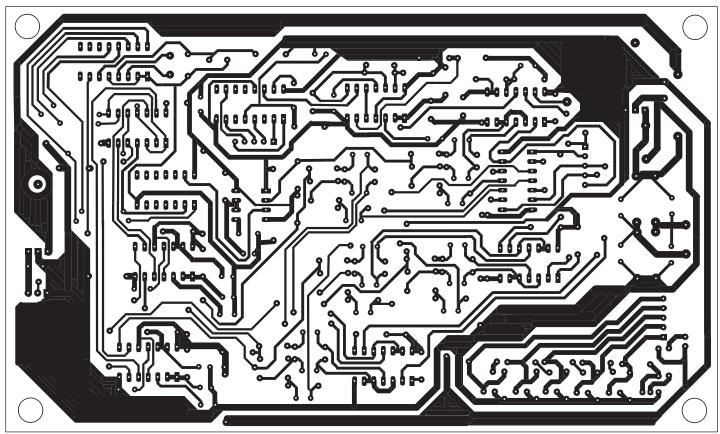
Actual-size, single-side PCB for circuits of Figs 1 and 3 (PCB-1)
